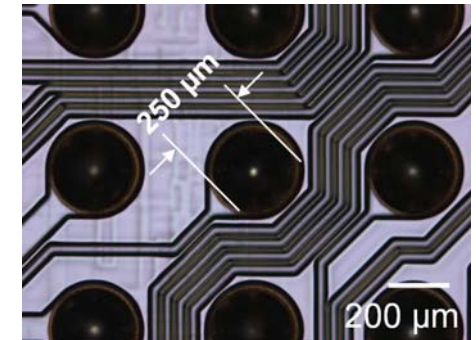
Re-wiring wafer after magnetic film deposition and solder bump preparation.
